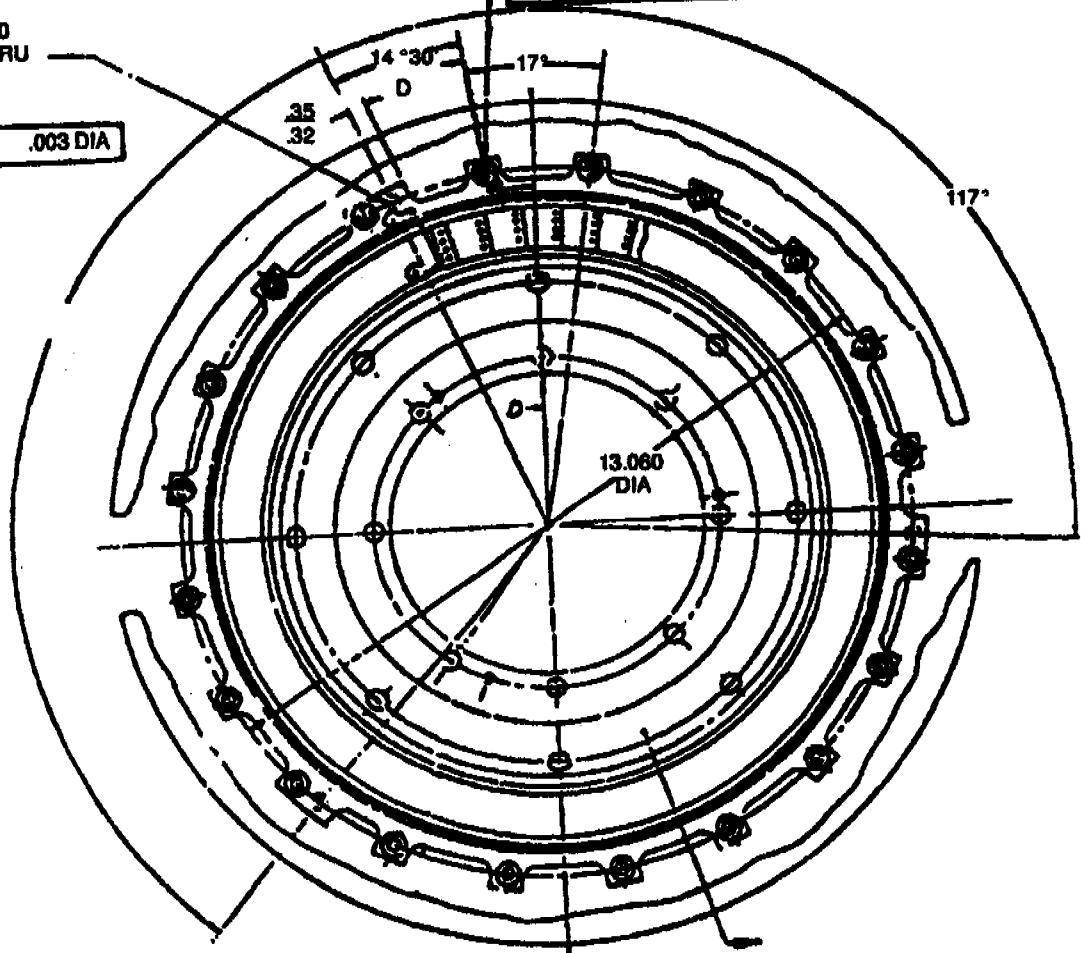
Spot Welding of Liner and Machine of Flange.
